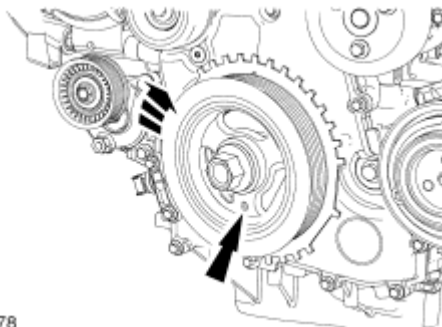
Identifying Hole In Crankshaft Pulley In 6 O'Clock Position
